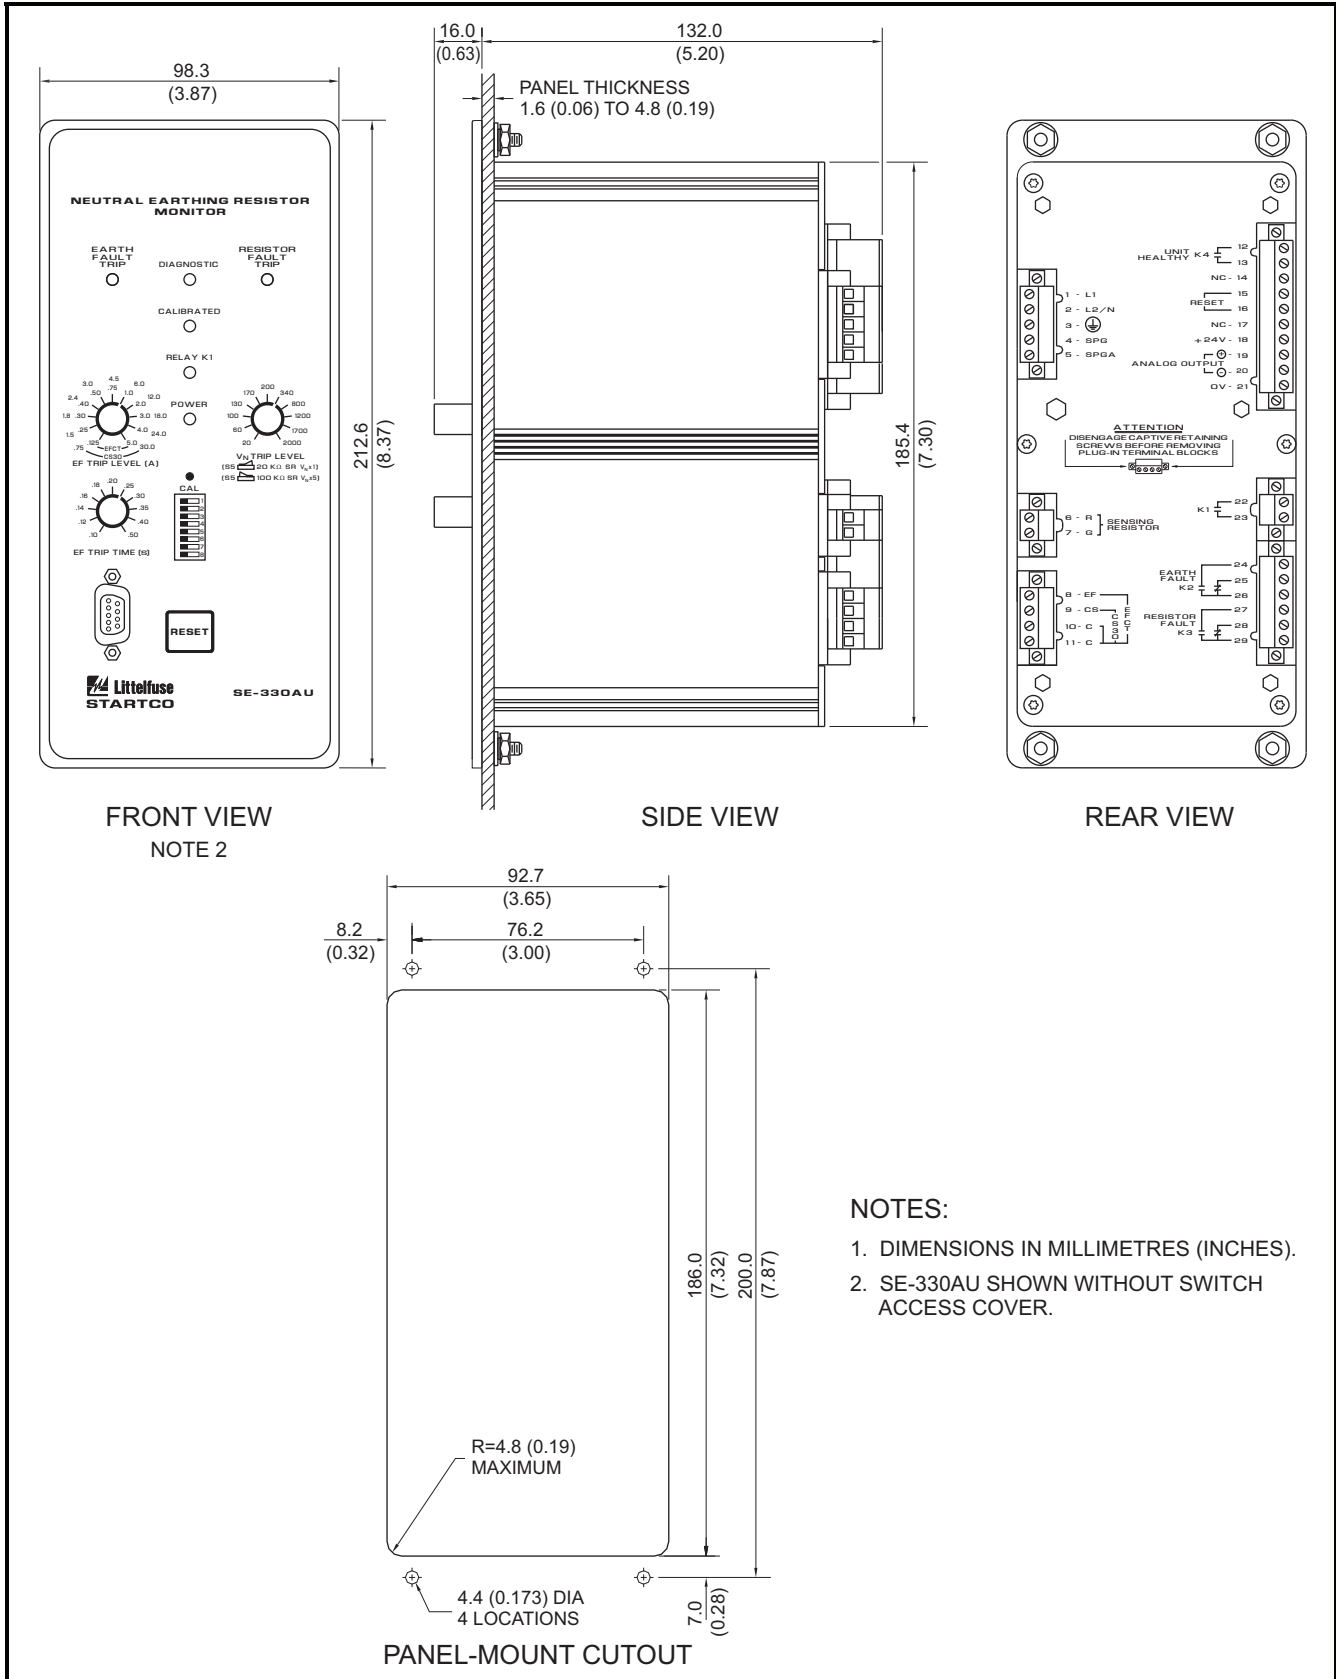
SE-330AU Outline and Panel-Mounting Details.
